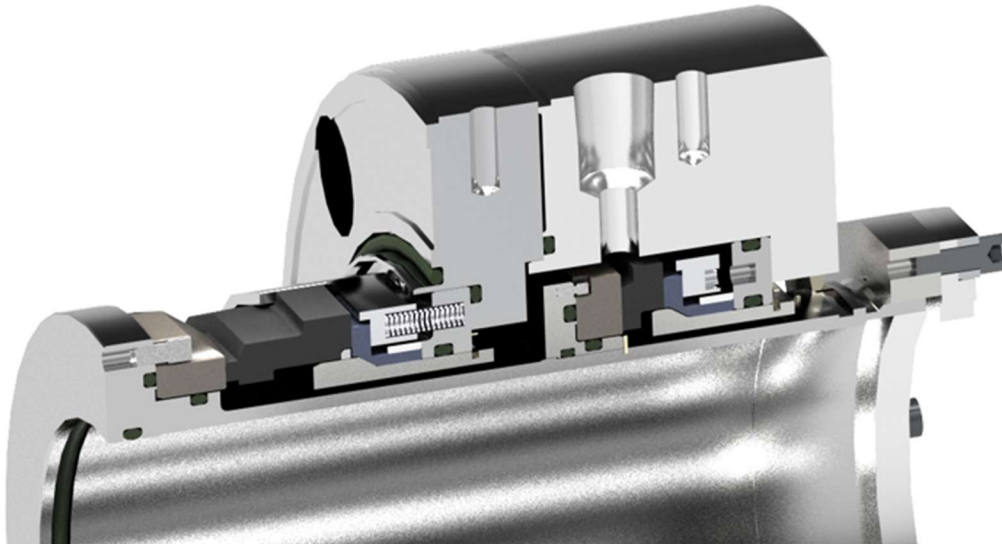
Dual un-pressurized seal with dry contacting containment & non-pusher secondary elements
